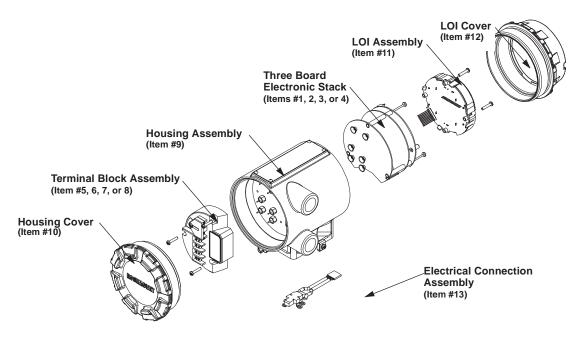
Model 8732C Exploded Parts Drawing.
